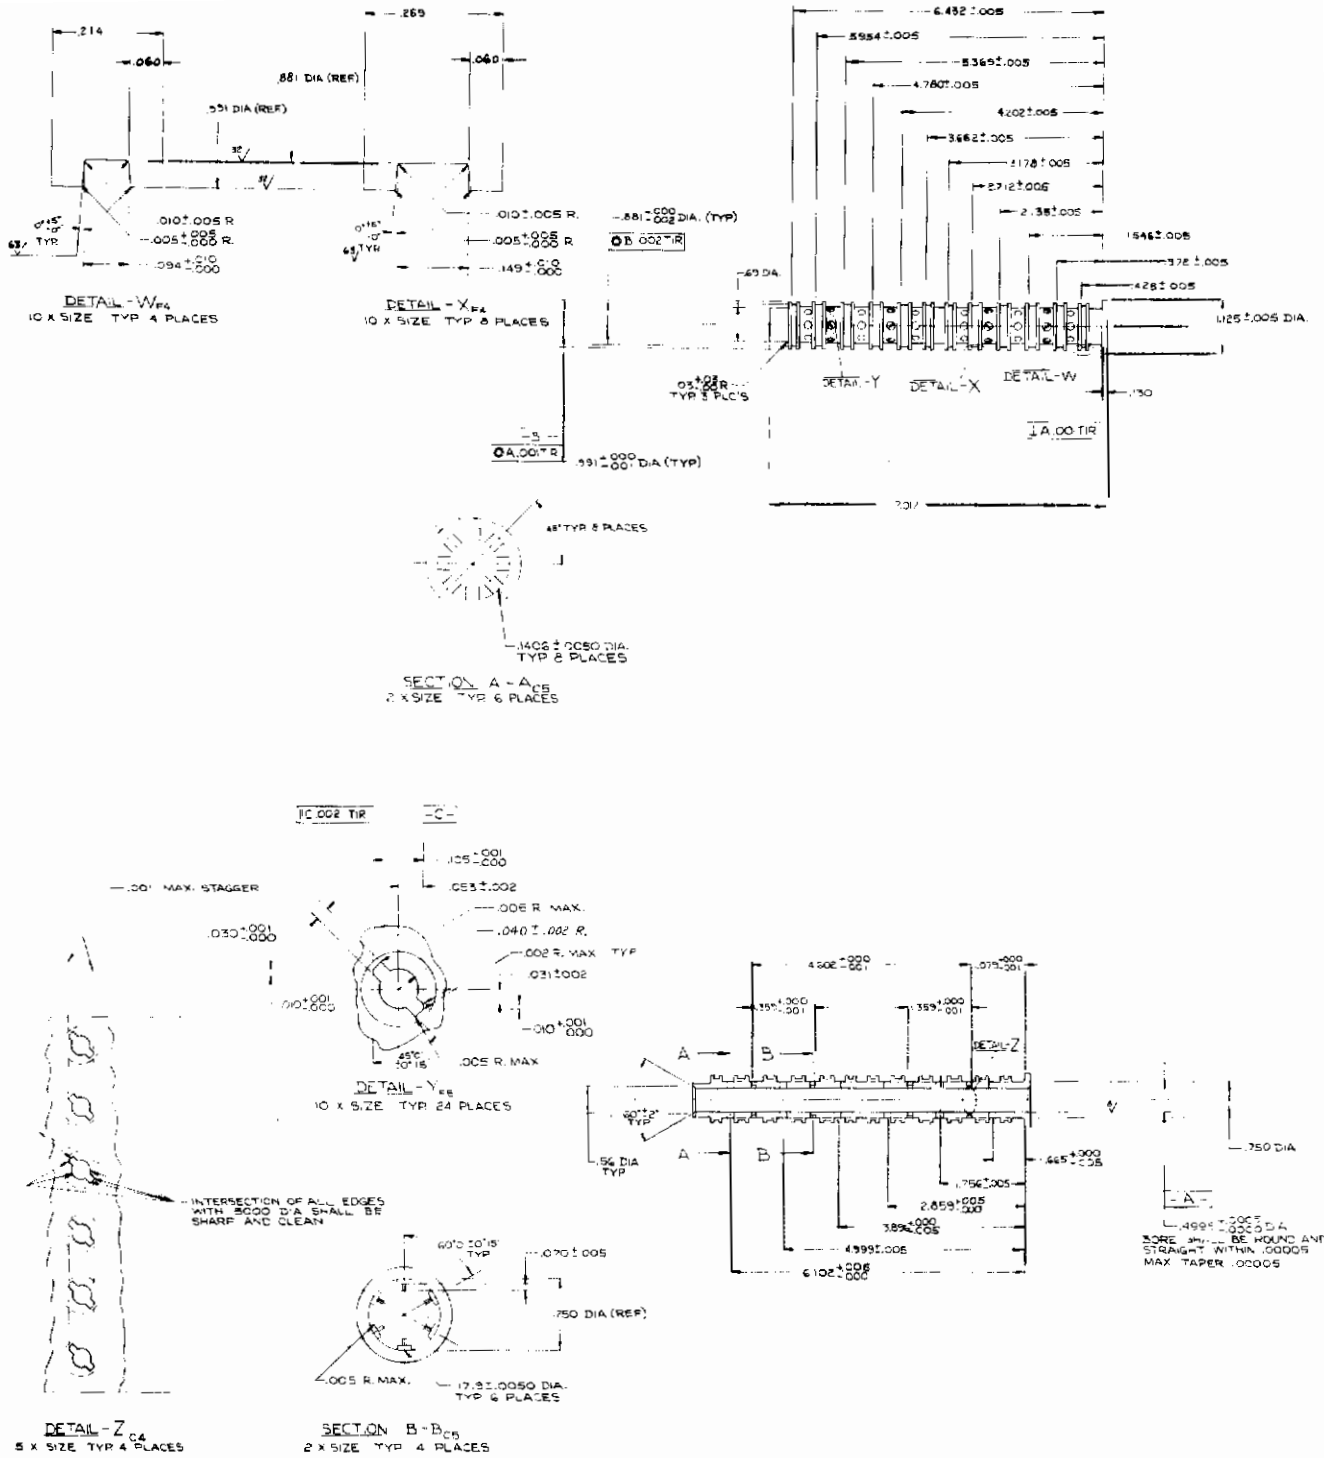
MAIN SERVO VALVE ASSEMBLY
